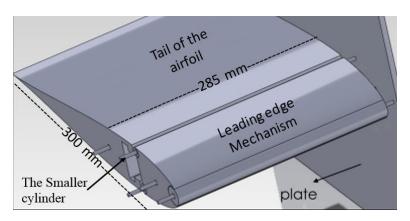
The Final Moving Conveyor Belt Mechanism Airfoil
